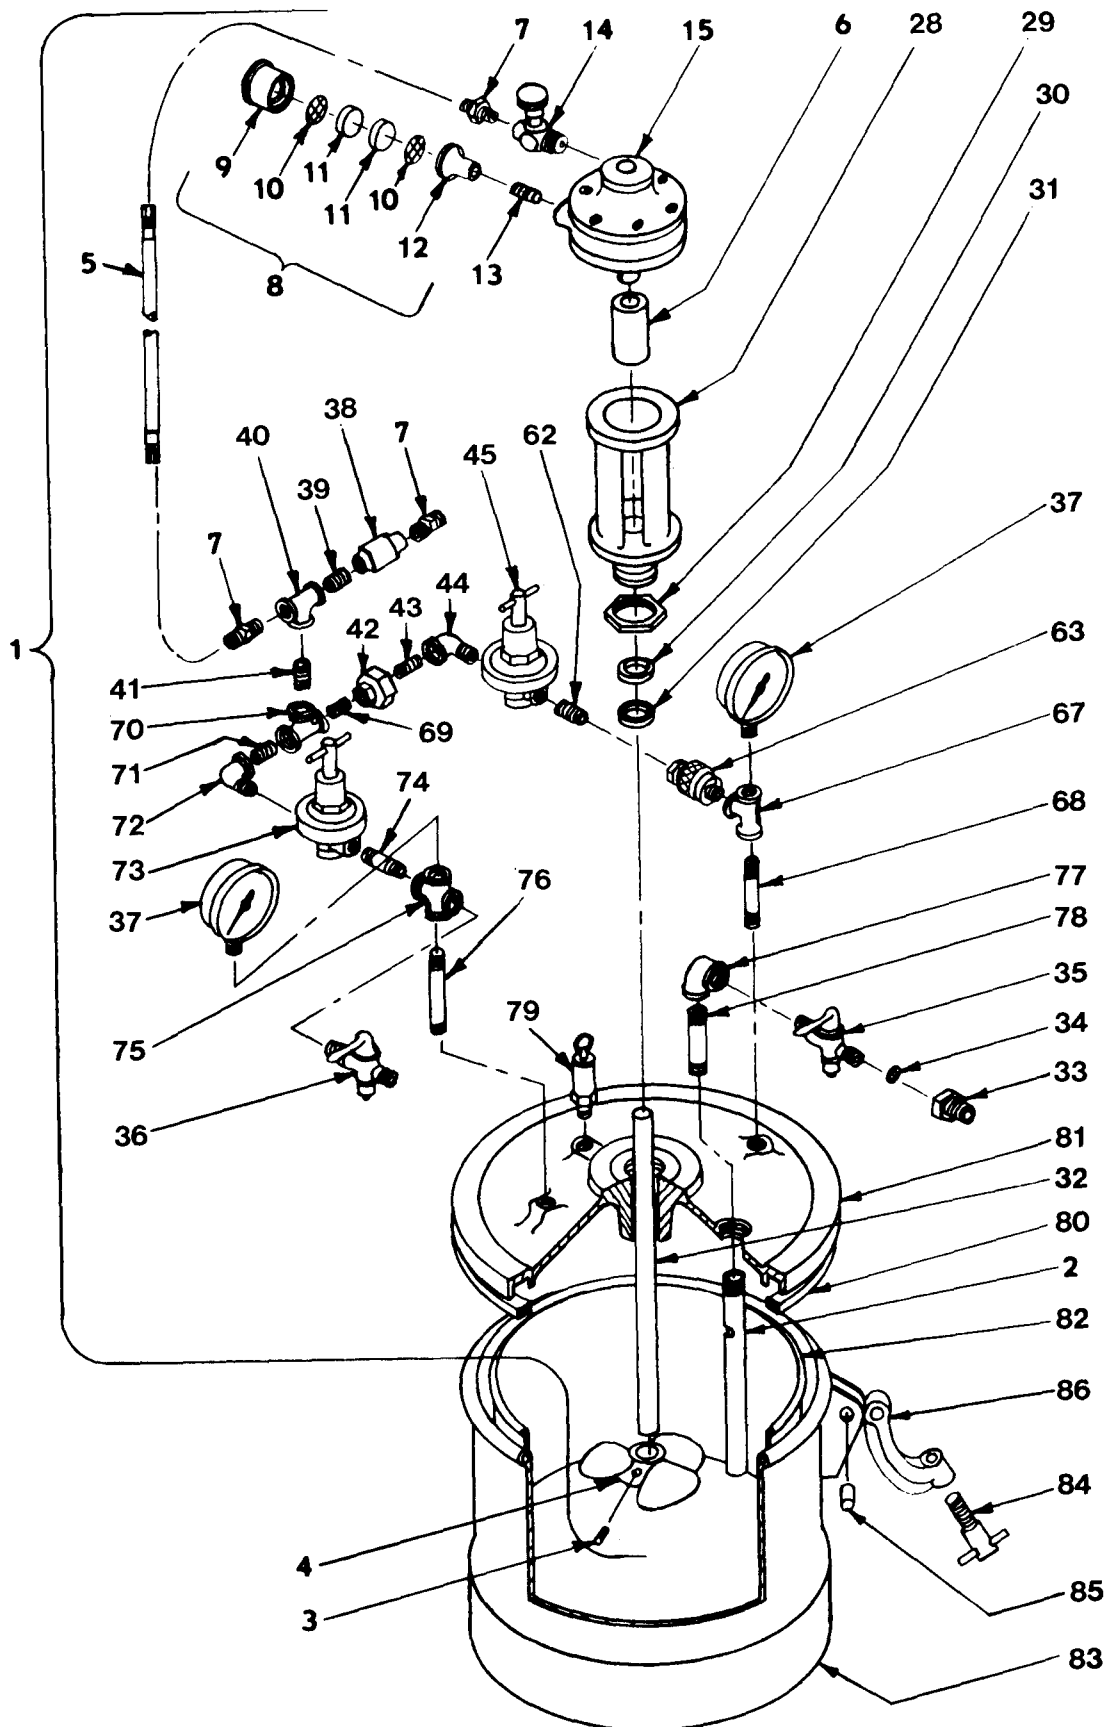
Pressure Tank Assembly (Sheet 1 of 4)
